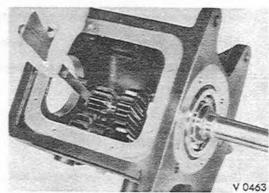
Adjusting the counter gear end play with feeler gauge.
